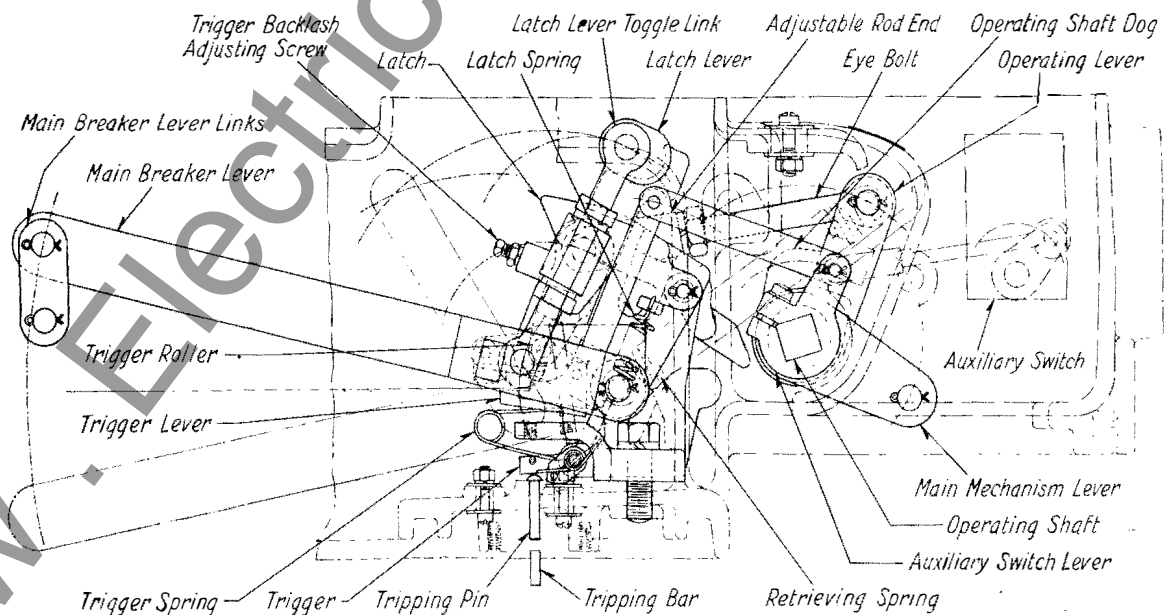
MECHANISM OPERATING LEVERS (SIDE VIEW)
